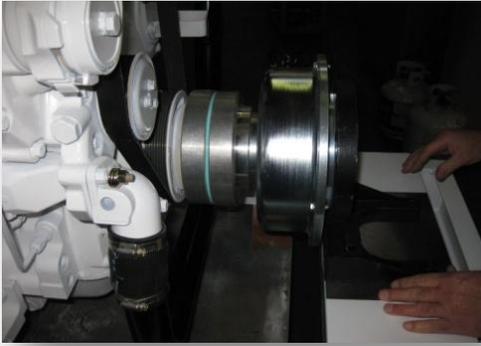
Seat the clutch assembly side of the coupling lightly, and then pull it away from contact, opening up a .015"-.020" air gap to avoid over-loading the engine crankshaft thrust bearing.
